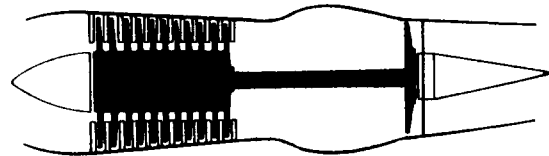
Solid-spool compressor—single rotor turbine.
